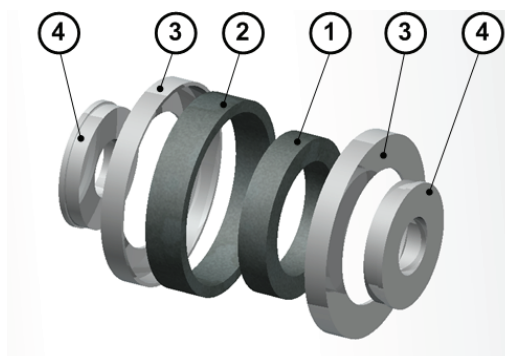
PMB components view. 1 - Inner ring, 2 - Outer ring, 3,4 - Aluminium casing.
